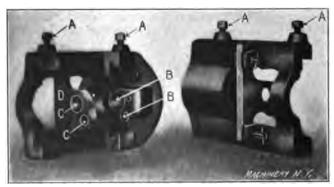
Example of Small Boring Jig, with Removable Leaf for Holding Guide Bushings
